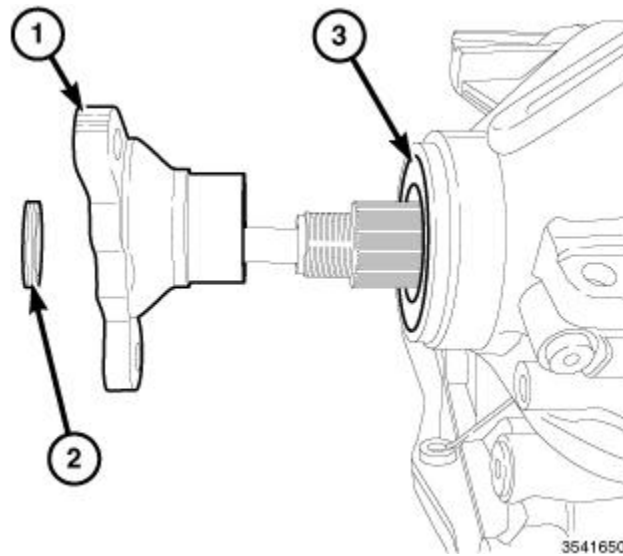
Propeller Shaft Flange, Rear Dust Seal & Rear Oil Seal
